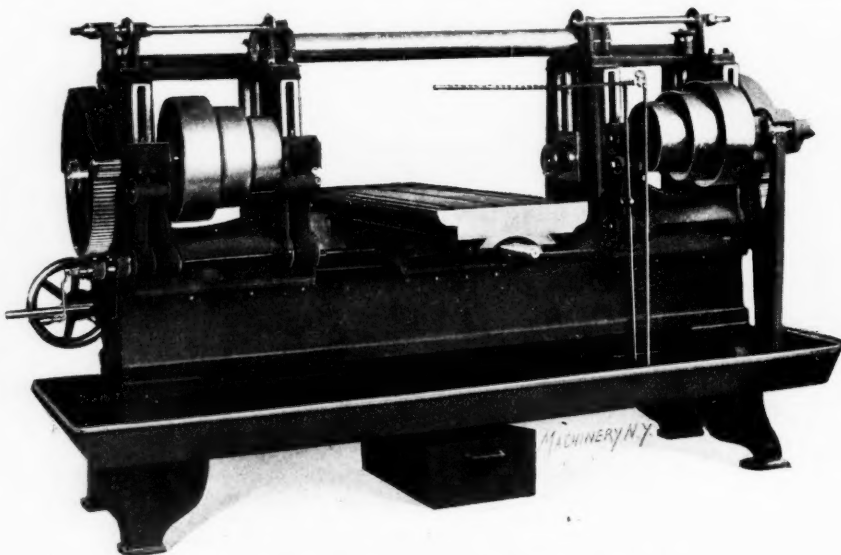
Rear View of the Double-head Lincoln Milling Machine
